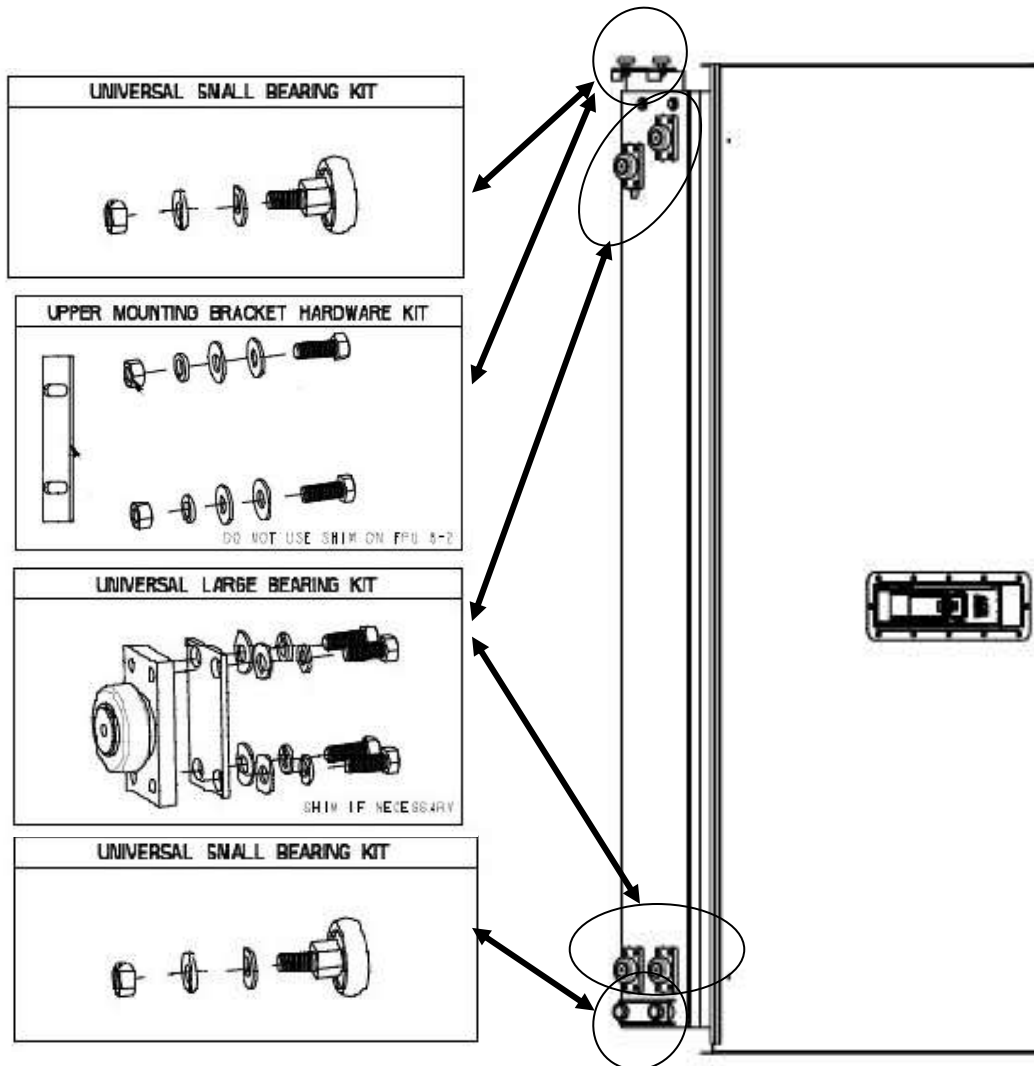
UNIVERSAL BEARING ASSEMBLIES DOOR #1 THRU #10
